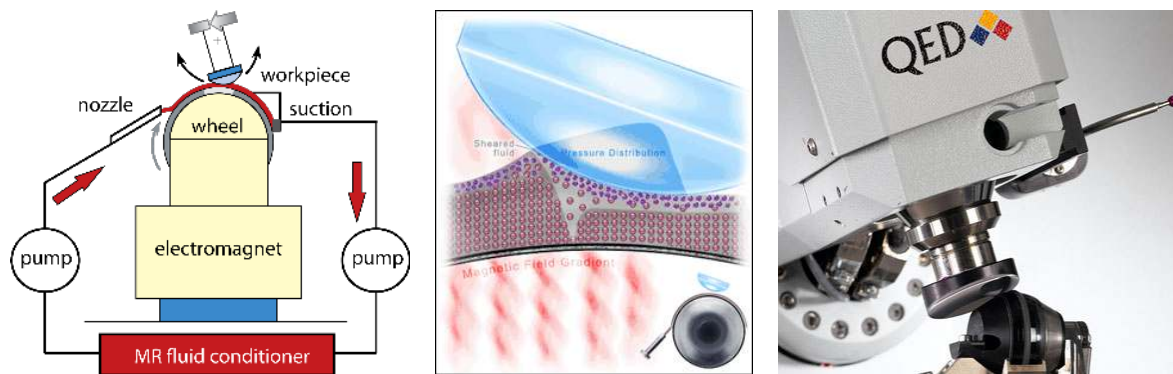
Magnetorheological finishing process. *Left:* Schematic of an MRF machine. *Center:* Picture showing MRF wheel polishing a workpiece. *Right:* MRF machine from QED Technologies 2016 QED Technologies Inc. polishing a workpiece [91]
